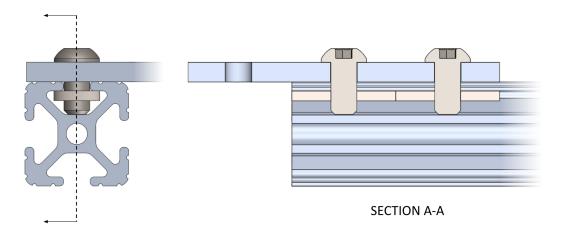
80/20 t-slotted framing cross section and fixtures.
